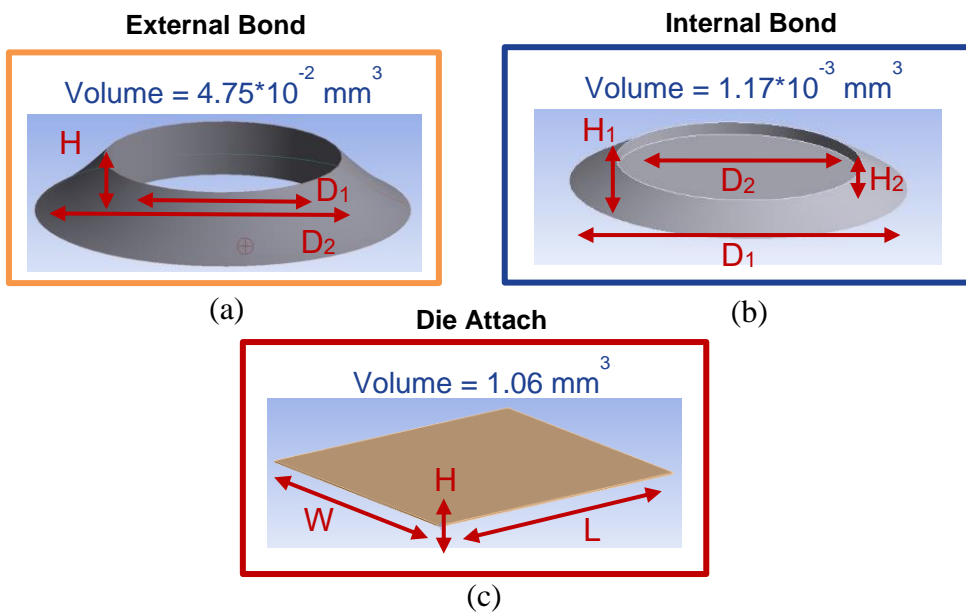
The bonds and dimensions used. (a) The External bond that connects the pin to the PCB. (b) The Internal bond that connects the pin to the die. (c) The Die Attach that connects the die to the DBC.
